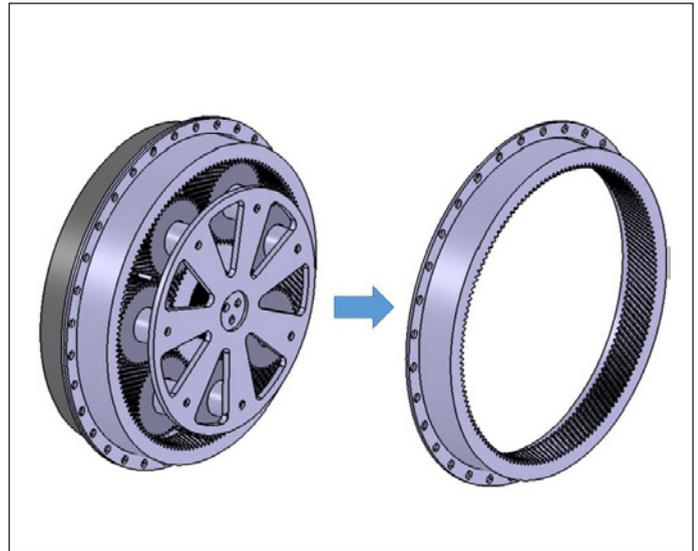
Planetary gearbox and right-hand ring gear component geometry.
